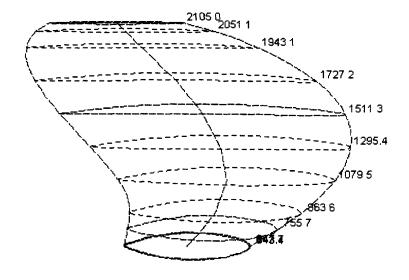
Combined Drawing of TRUMP Propeller Blade (3rd Angle Projection)
